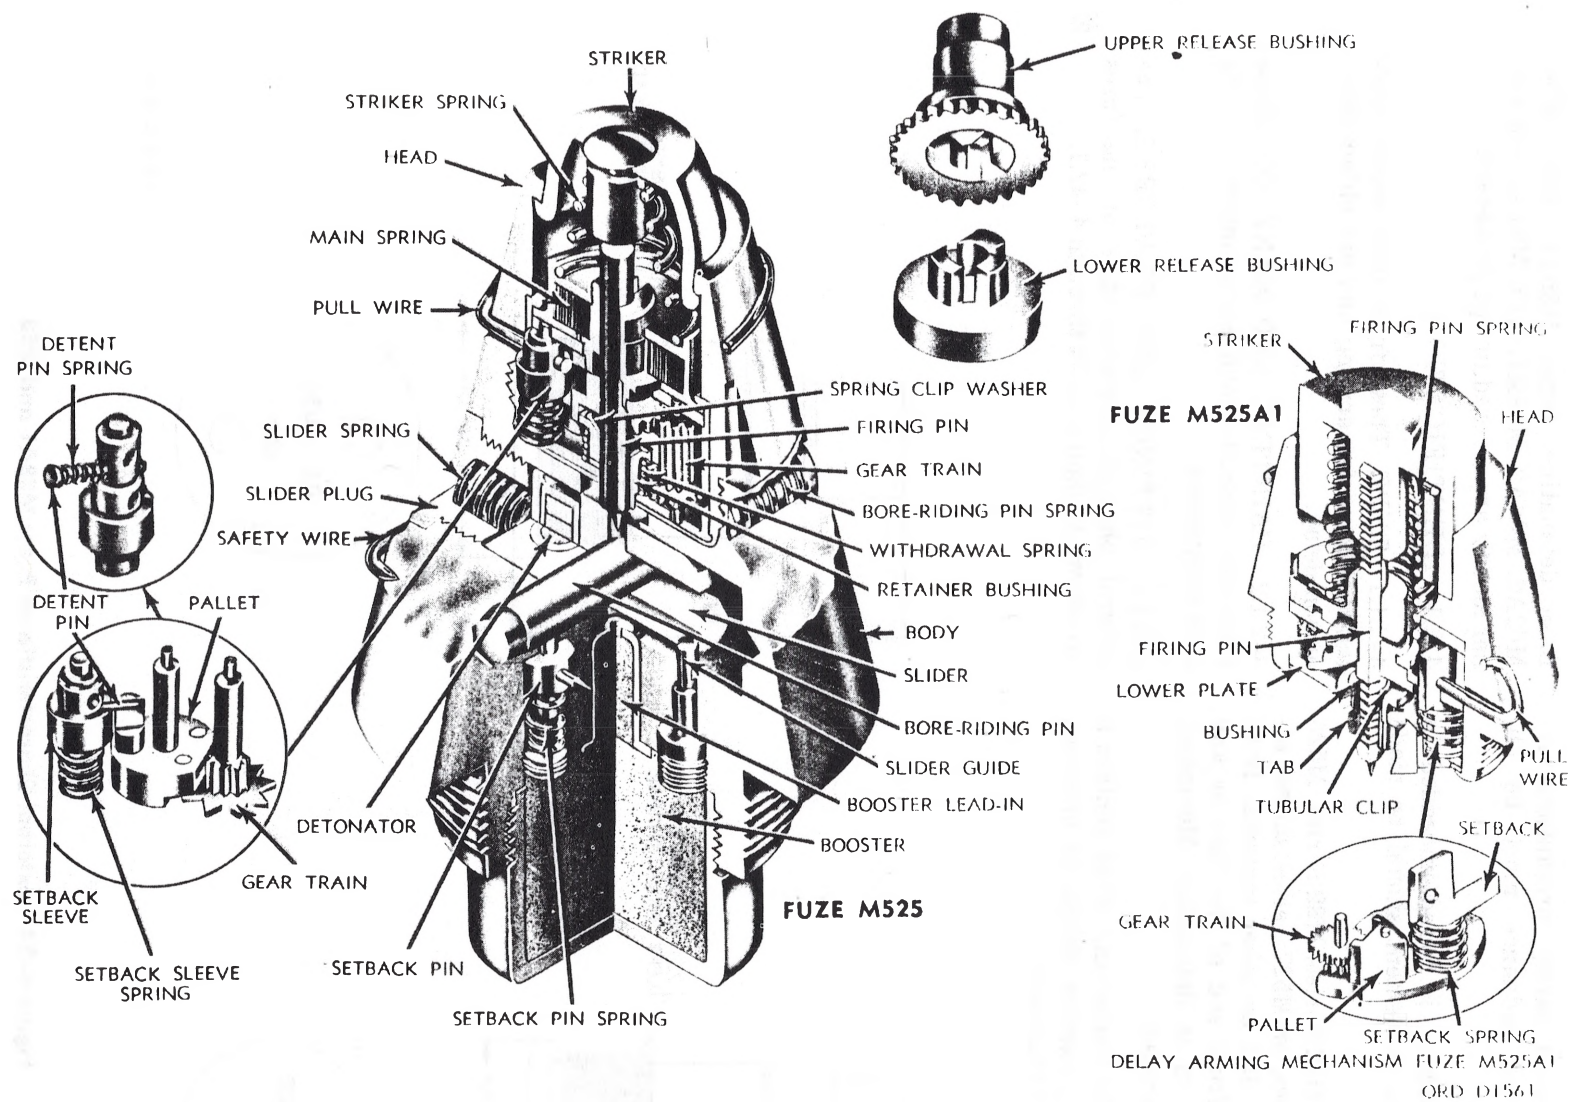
Fuze M525 Series, Cutaway View Showing Unarmed Condition
